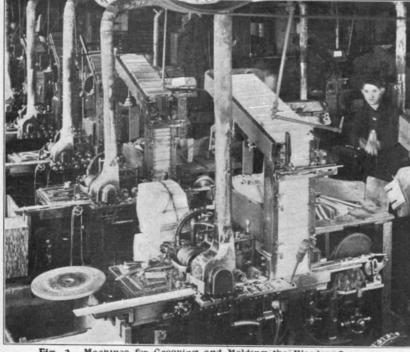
Machines for Grooving and Molding the Wooden Casings.
